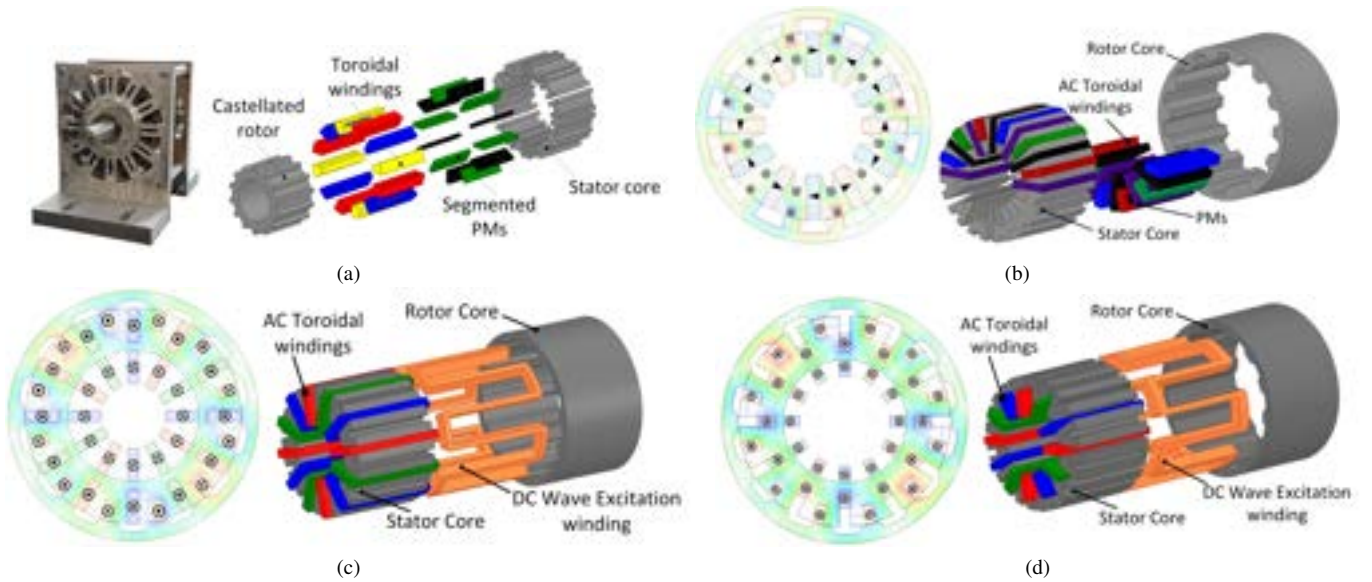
Exploded and cross-sectional views of (a) high power density motor prototype using PM, (b) outer rotor design employing PM flux intensification techniques, (c) proposed novel design employing DC excitation with overlapping windings, and (d) proposed novel design employing DC excitation with non-overlapping windings. An alternative topology for the DC winding employs, similarly to the AC winding, concentrated toroidal coils and is not illustrated in the figure.
